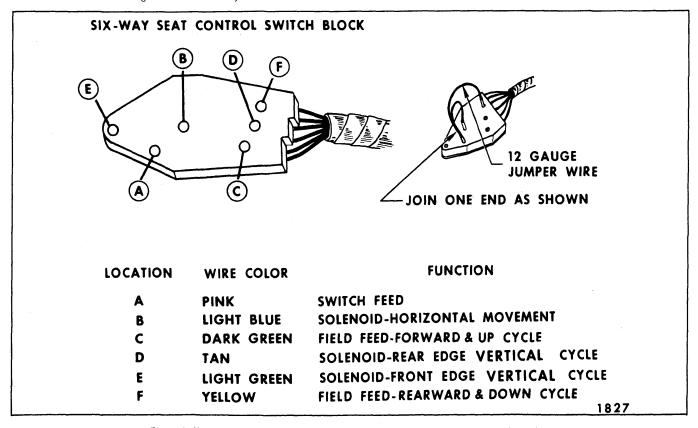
Six-Way Seat Switch Block - Switch in Arm Rest - Oldsmobile
